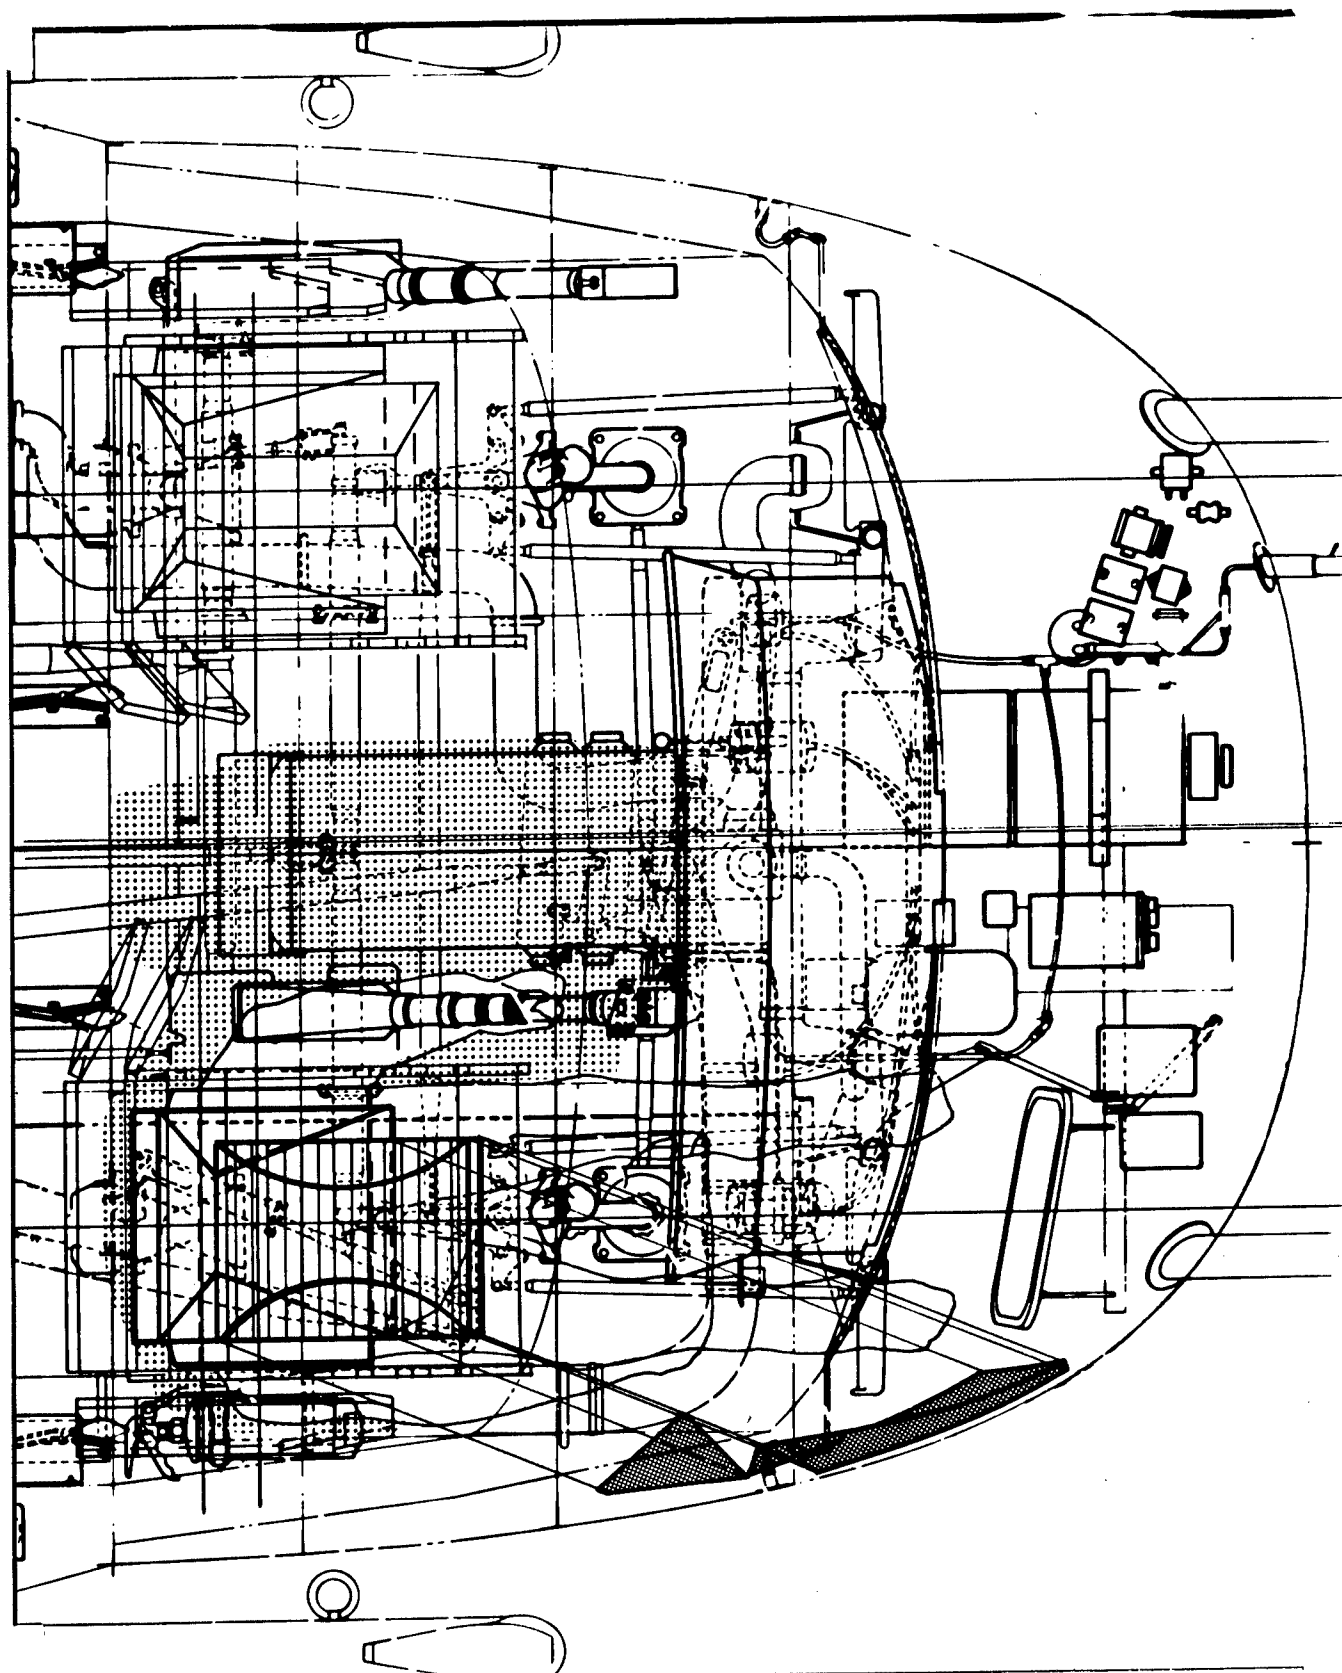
ARMOR CONFIGURATION 2 -- PLAN VIEW 22° AZIMUTH, -45° ELEVATION
